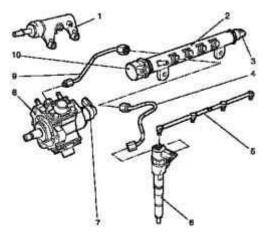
The components of the fuel system «Common Rail»: 1 - damp housing, fuel return, 2 - high-pressure chamber, 3 - pressure sensor, 4 - a pipeline of high pressure (pressure chamber to the fuel injector), 5 - oil line 6 - the fuel injector, 7 - high pressure pump, 8-pressure regulator, high pressure pump, 9 - pressure regulator, pressure regulator, 10 - line of high pressure (high pressure pump to a pressure chamber)
